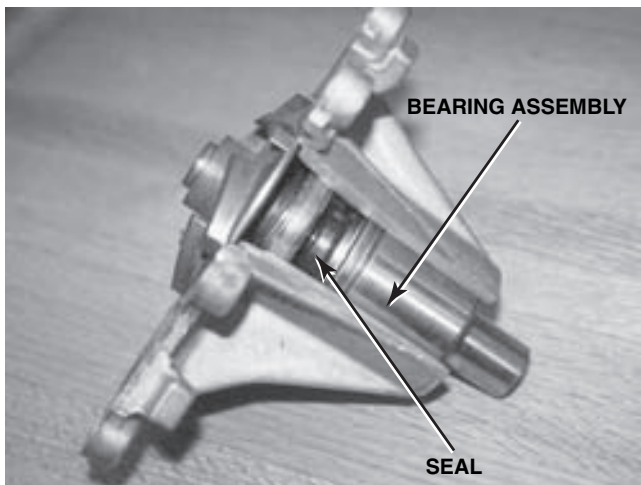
A cutaway of a typical water pump showing the long bearing assembly and the seal. The weep hole is located between the seal and the bearing. If the seal fails, then coolant flows out of the weep hole to prevent the coolant from damaging the bearing.
